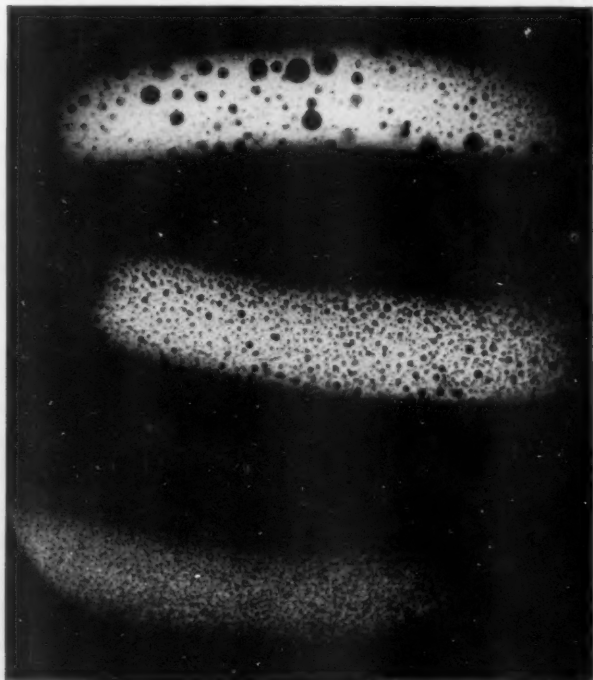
THREE SLICES FROM A BRONZE CASTING TAKEN NEAR THE COPE SURFACE. LOWER—TINY BUBBLES OF EVOLVED GAS. MIDDLE—SLIGHTLY LARGER BUBBLES FORMED BY COALESCENCE. UPPER—CLUSTER POROSITY AT THE COPE SURFACE. MAGNIFICATION, 2X.
